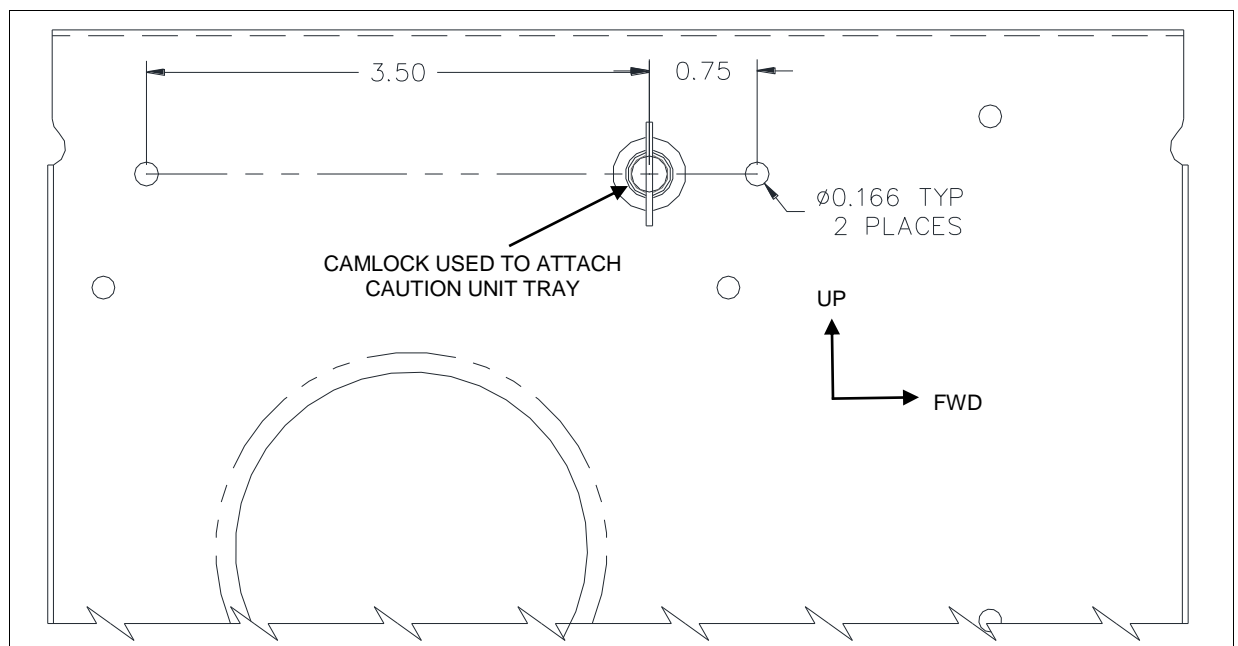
Caution Unit Tray attachment hole locations. Tolerance ± 0.05 ”
